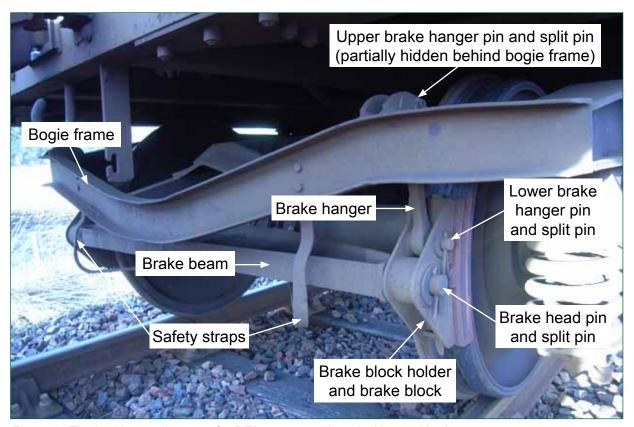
The braking equipment of a BFA wagon equipped with tread brakes
